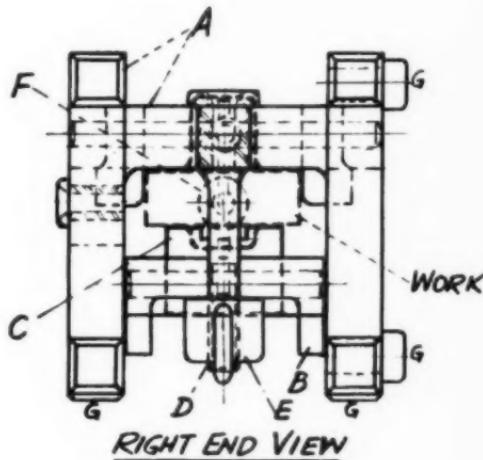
A channel-and-leaf jig that introduces several improved features.
